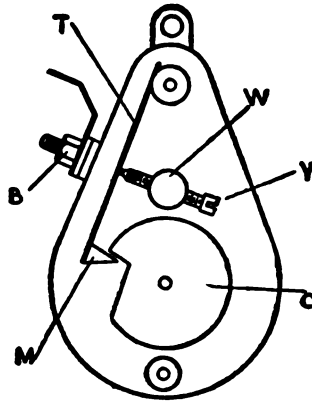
Contact Maker Fitted to the Earlier Single-Cylinder De Dion Motors.
